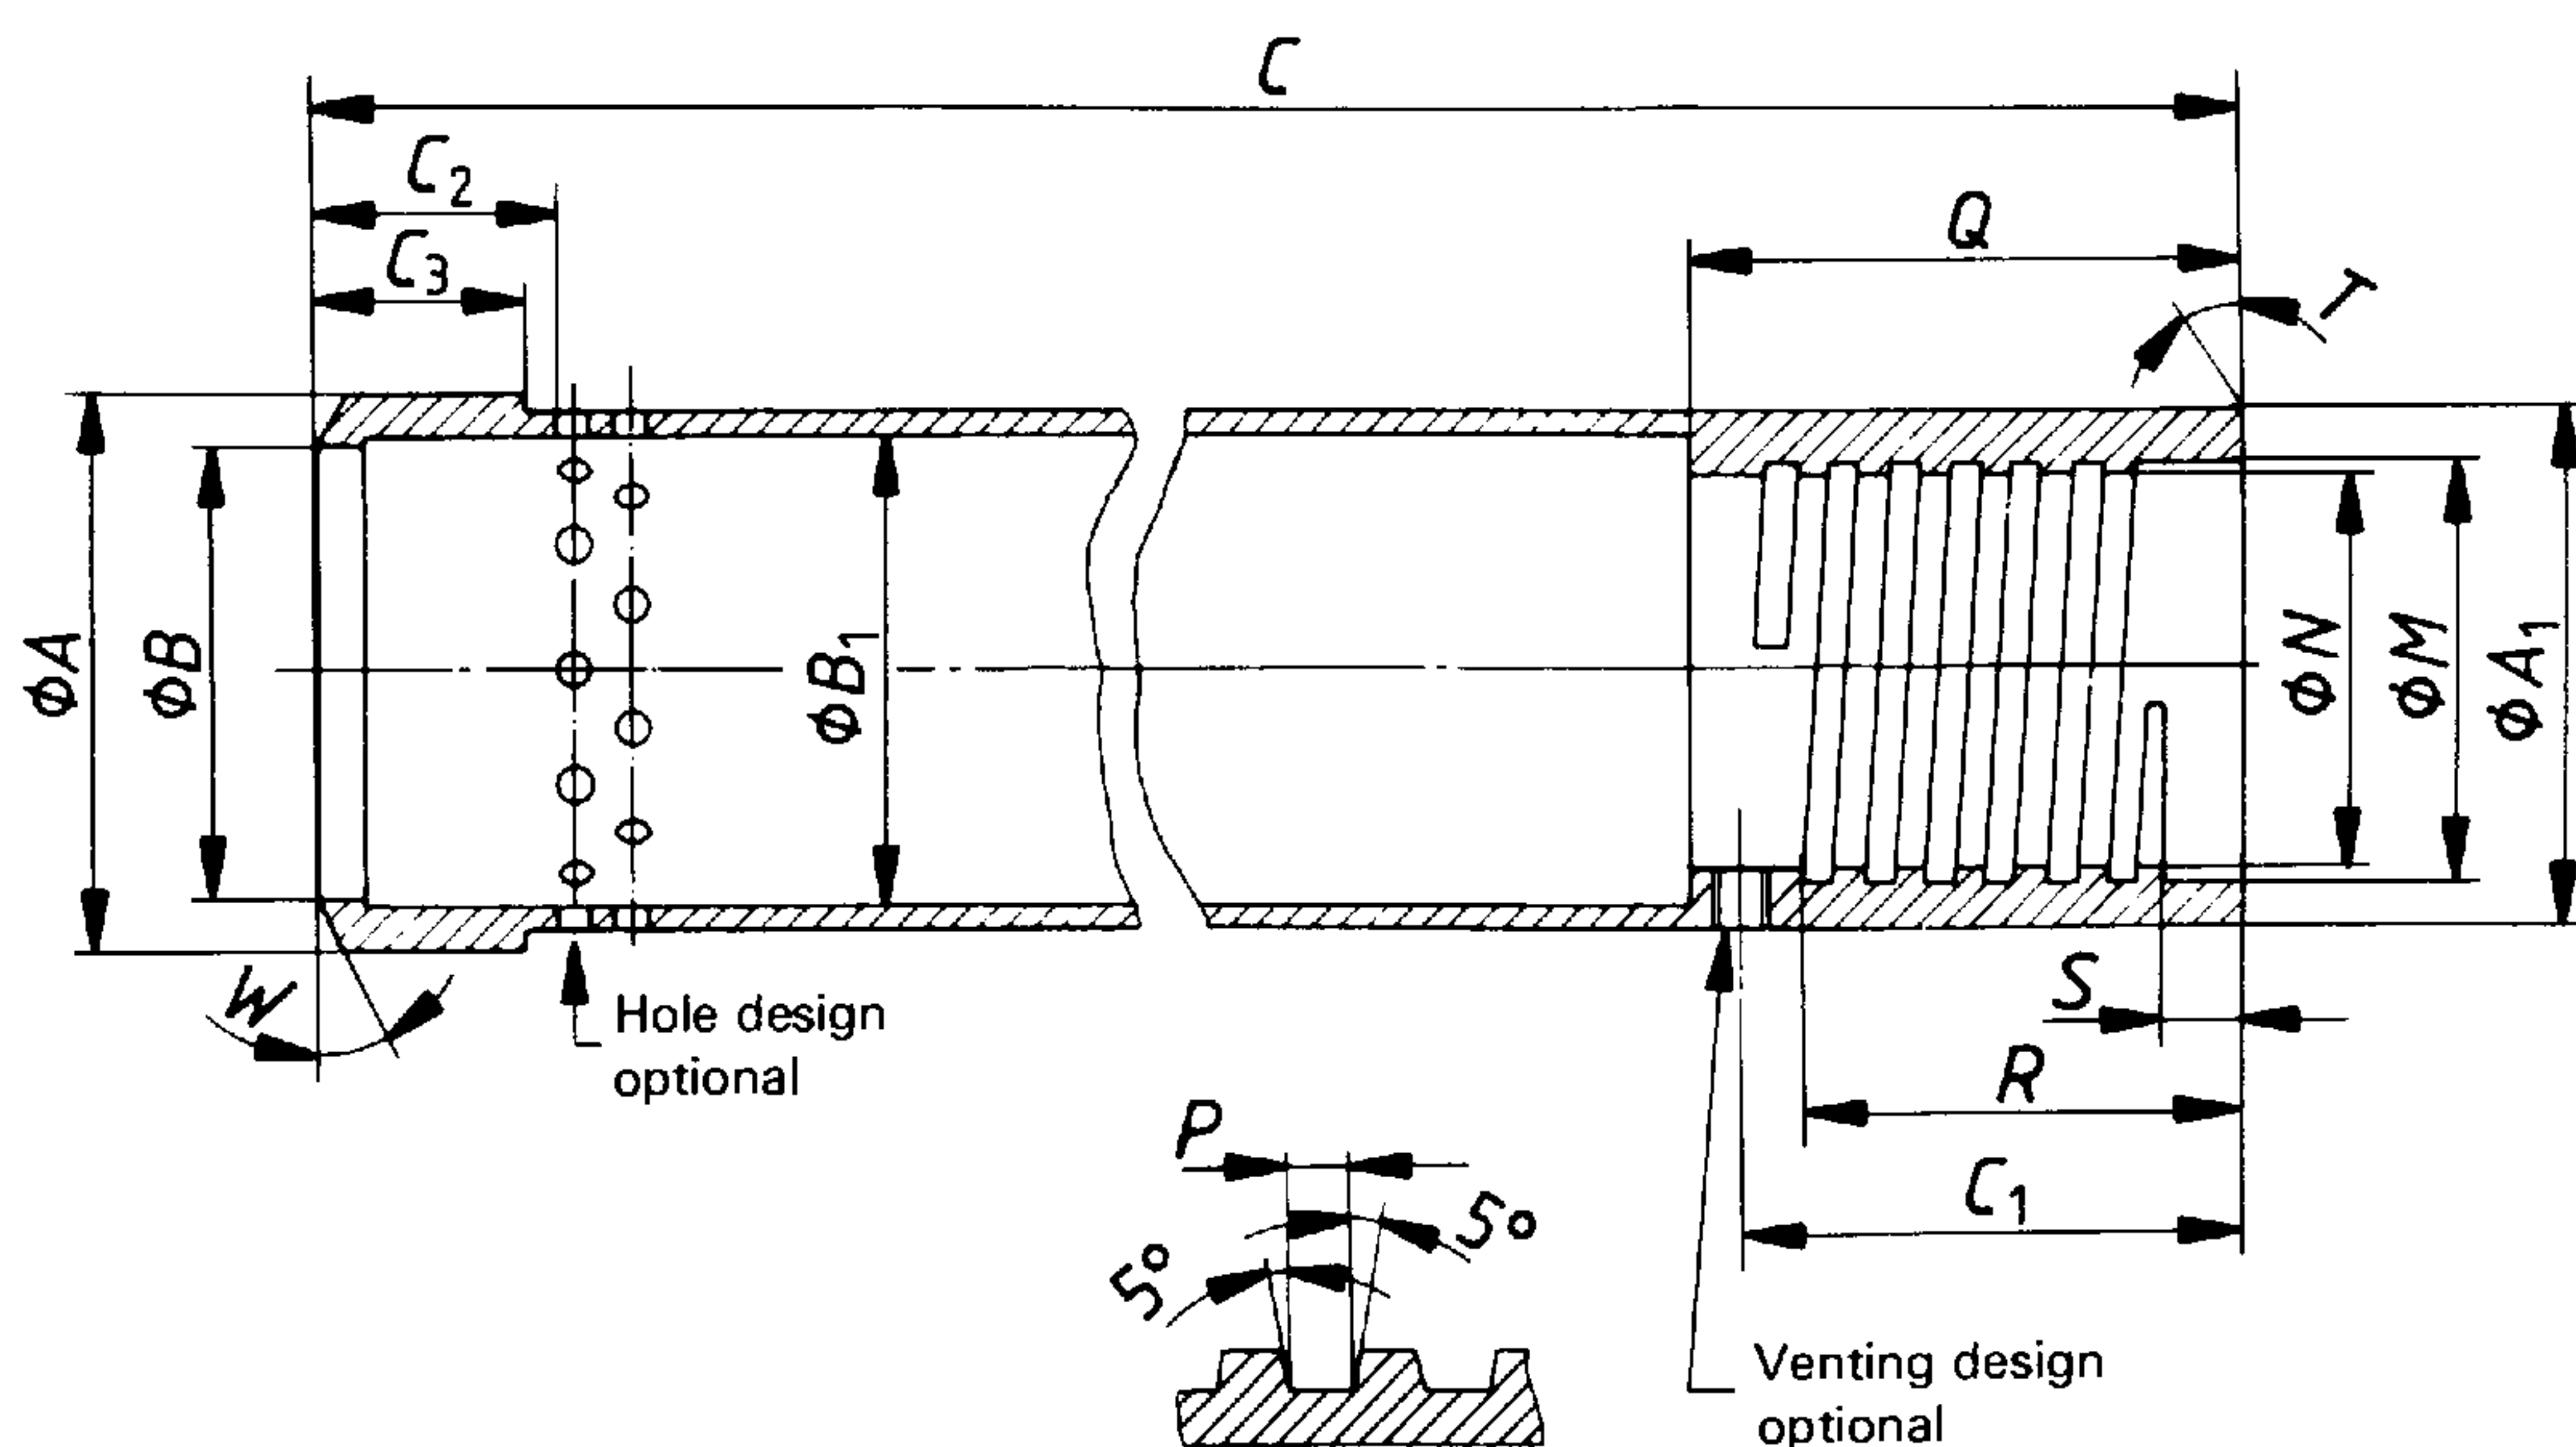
"WT" design double-tube core barrel — Inner tube (see table 49)
